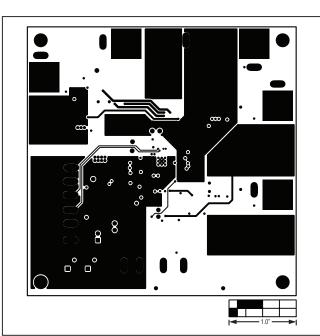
MAX17085B EV Kit PCB Layout—Power Planes (Layer 3)
